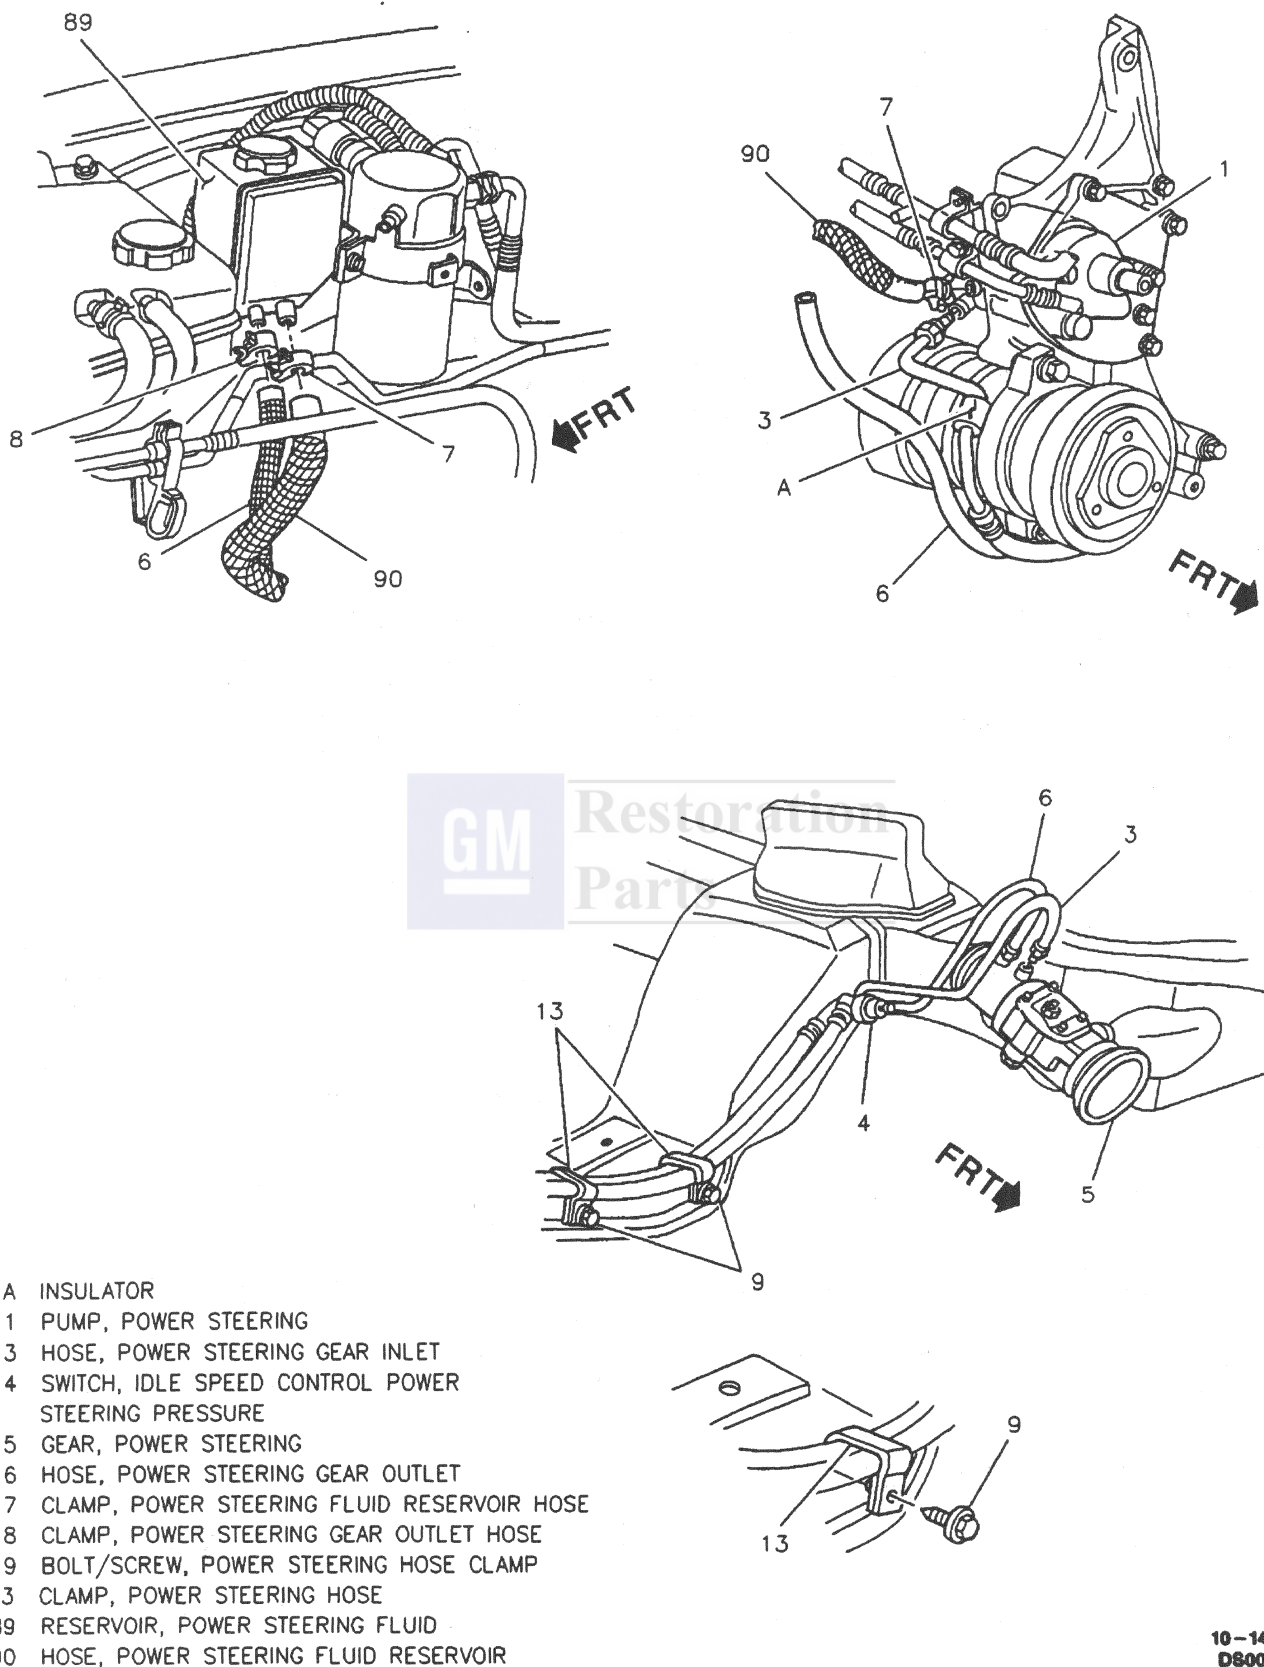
Power Steering Gear Inlet and Outlet Hoses
